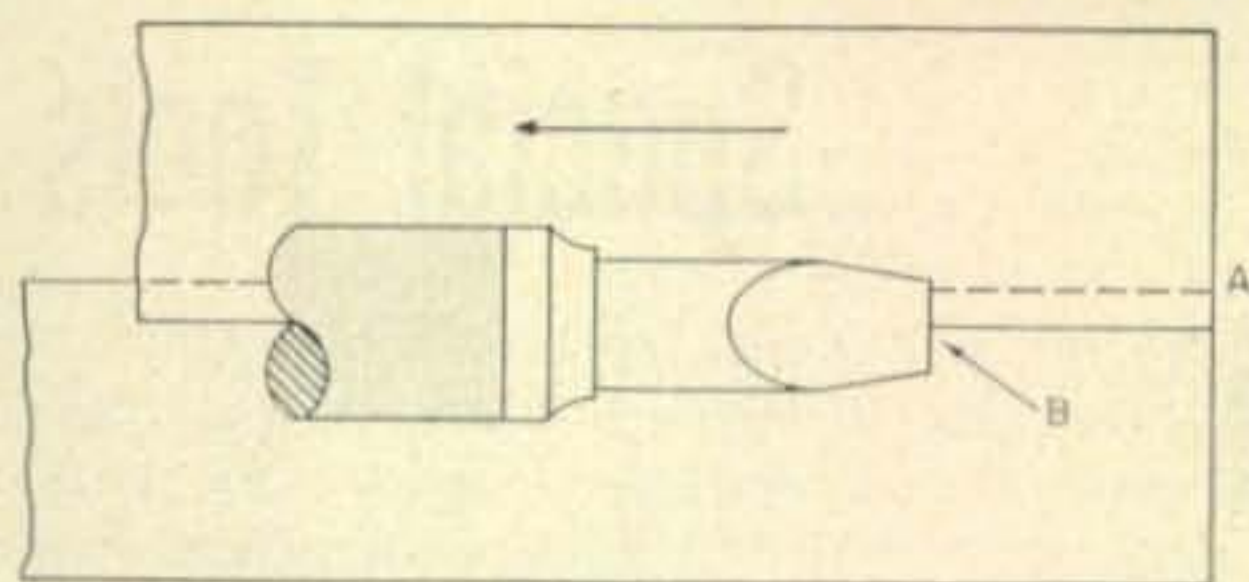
Soldering sheet metal. Overlap is indicated by line A. The solder should be applied at B while the iron is slowly drawn in the direction shown.
